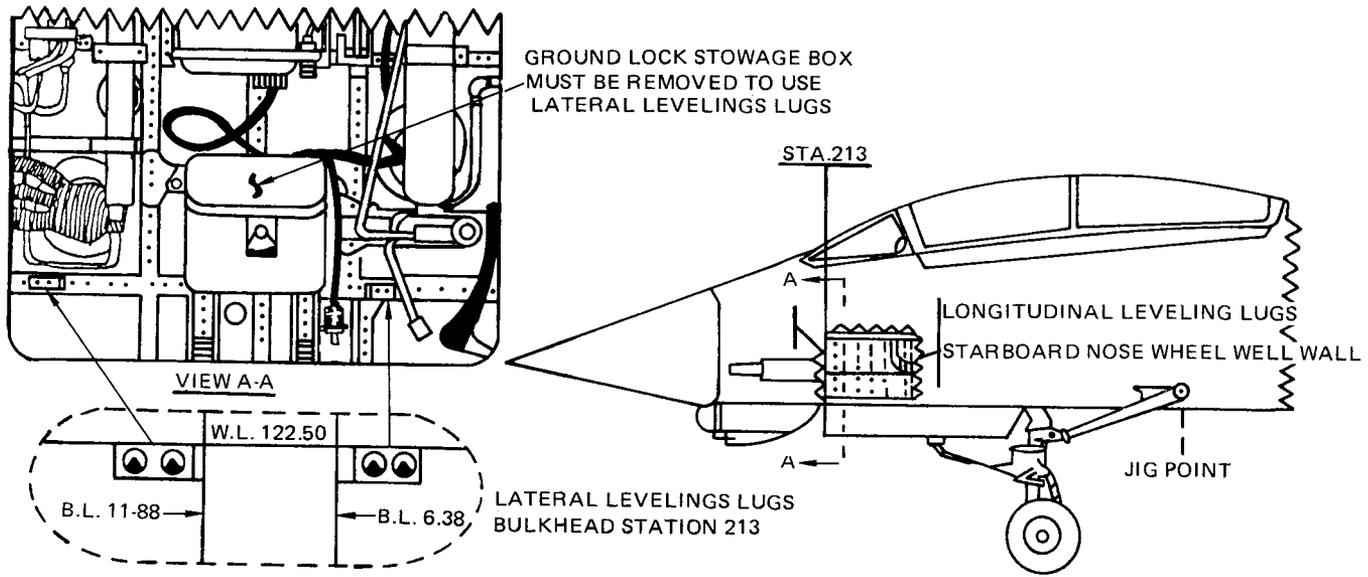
Leveling Lug Installation Inside Nose Gear Wheel Well
